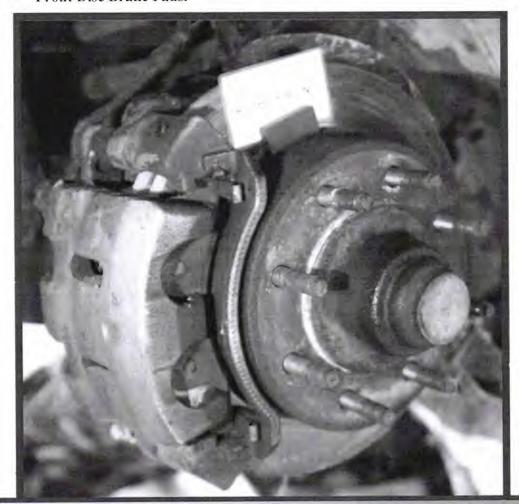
This photograph depicts the right front disc brake components of the 2001 Ford Excursion stretch limousine. The extreme thermal effects were prevalent, inclusive of the pungent odor of burnt materials/components which was overpowering at the time of examination.
